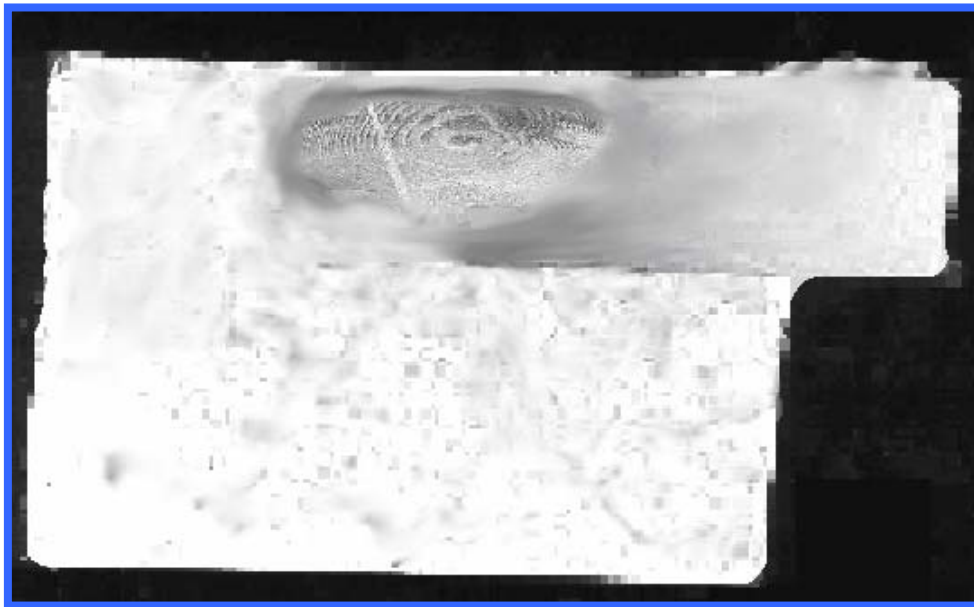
Transverse Section of 6mm Wrought Aluminum Welded to Cast Aluminum
